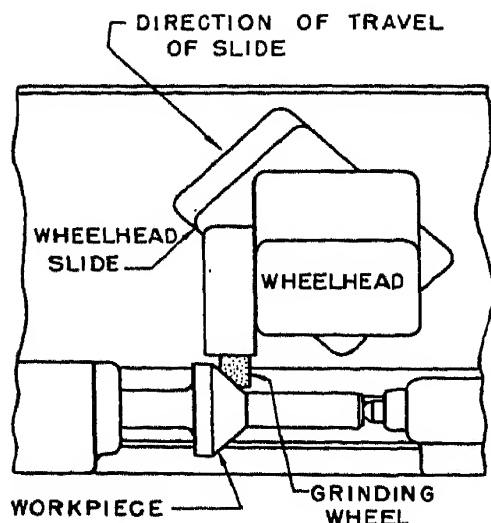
A diagram of a universal centertype grinder arranged for grinding a steep taper.
